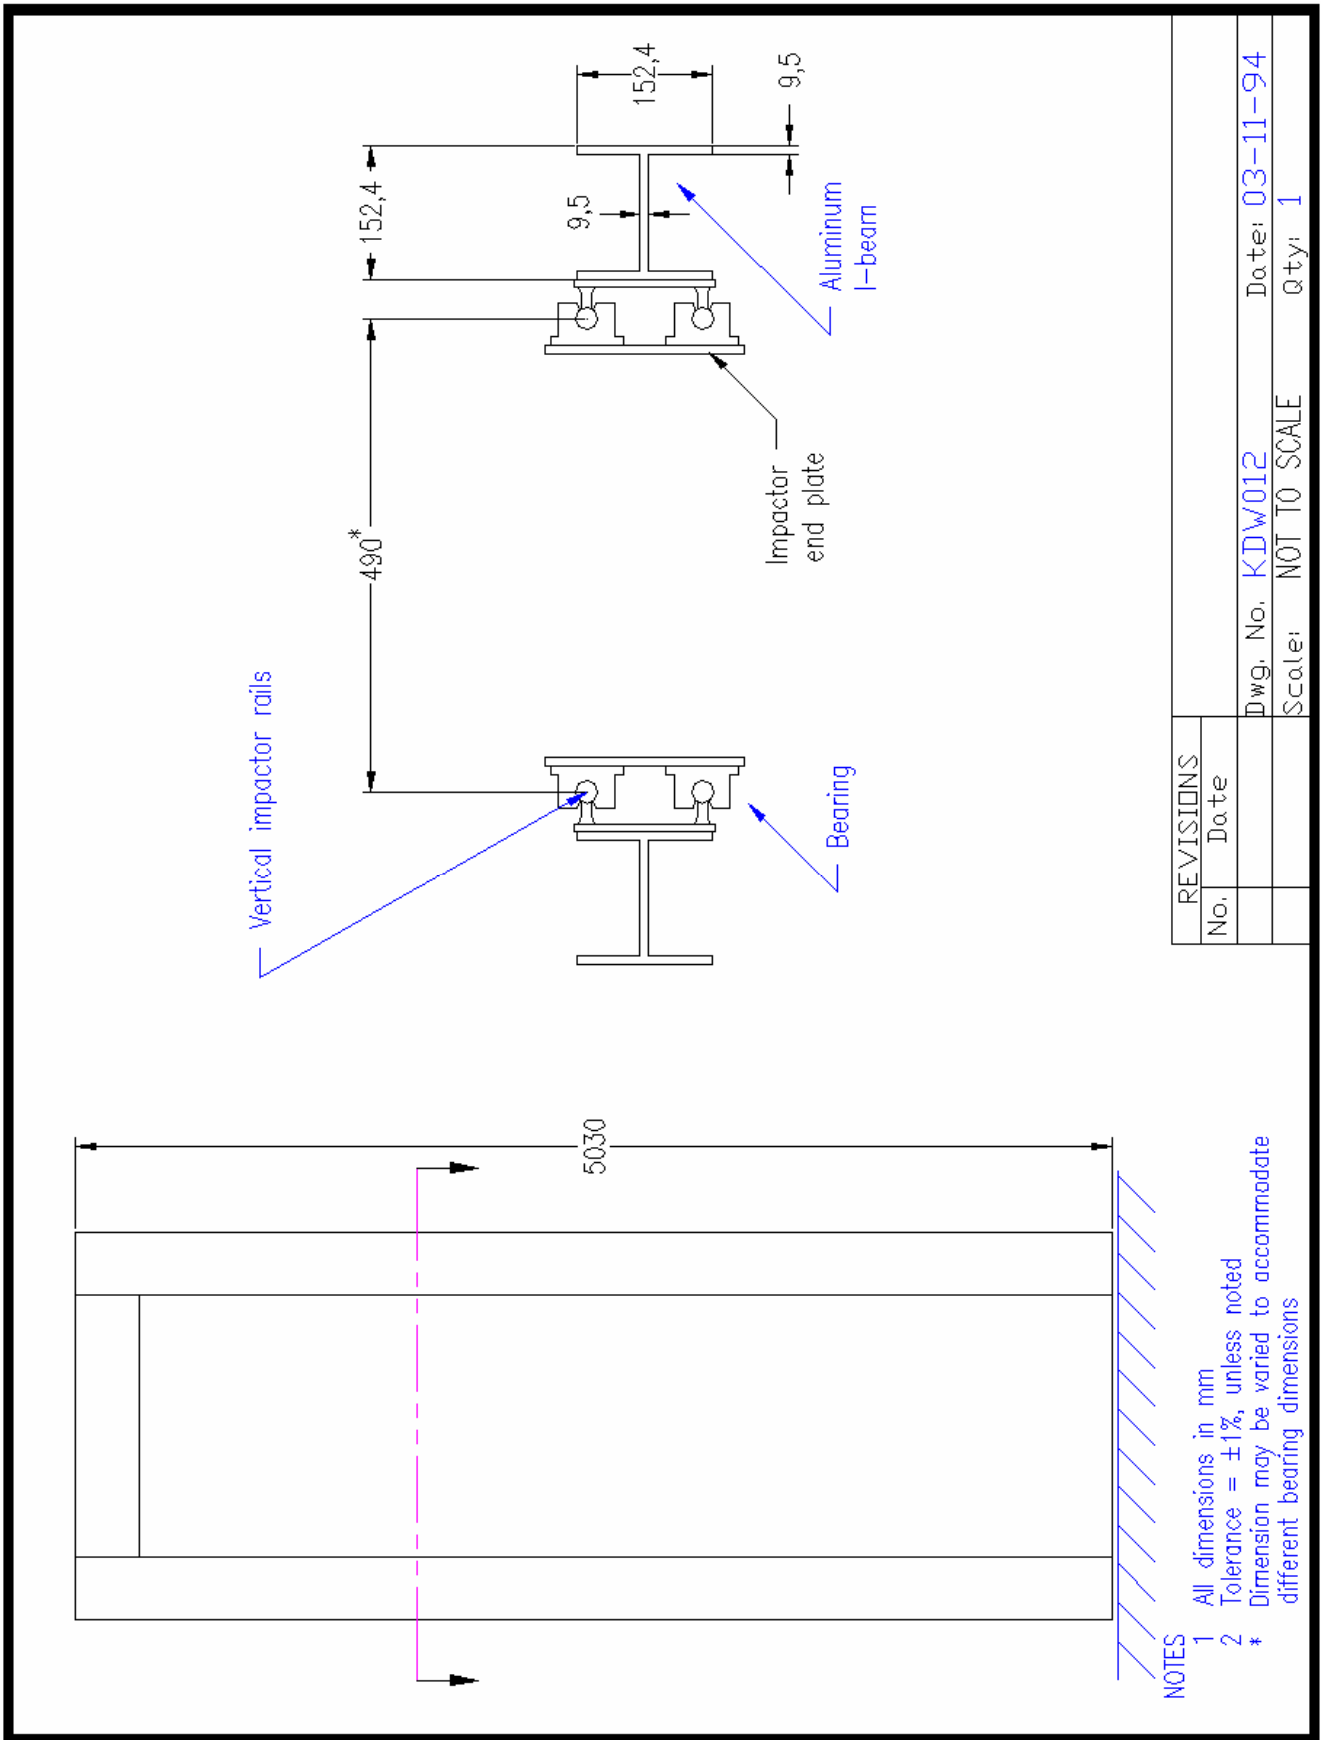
Impactor rail support for the bone dynamic bending fracture test
